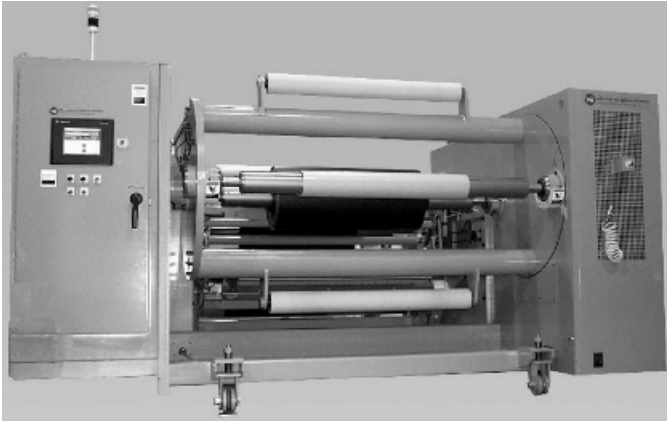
Turret-style winder. (Courtesy of Parkinson, Woonsocket, RI.)
